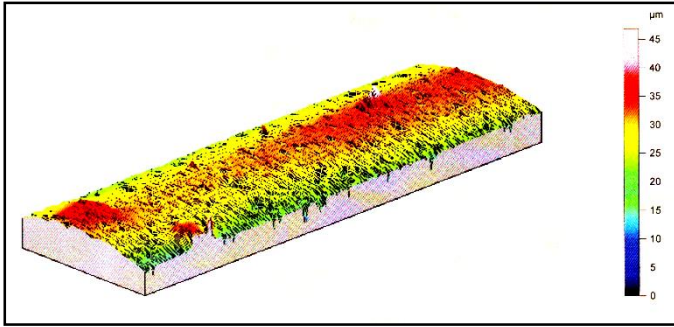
View of the 3D surface image of the iron-copper detail after sintering.
